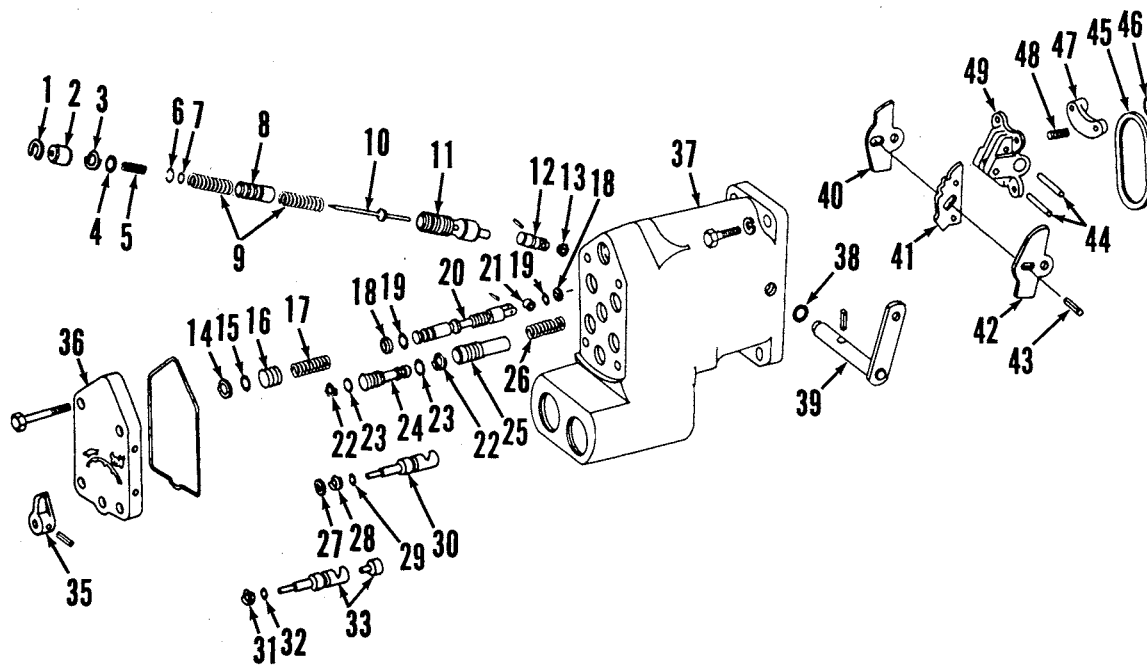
Exploded view of selective control valve (SCV) assembly used on all models.
